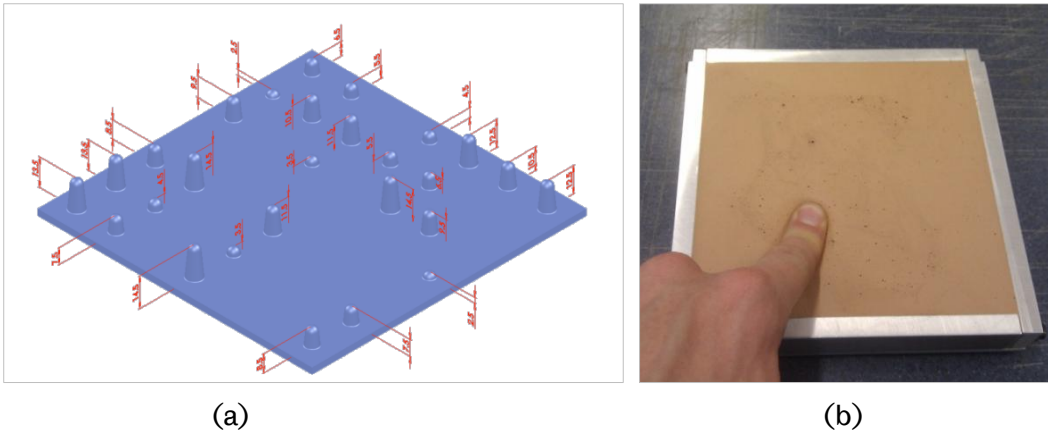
SMETT 'P&P' Mark IV prototype (a) CAD model and (b) after moulding
